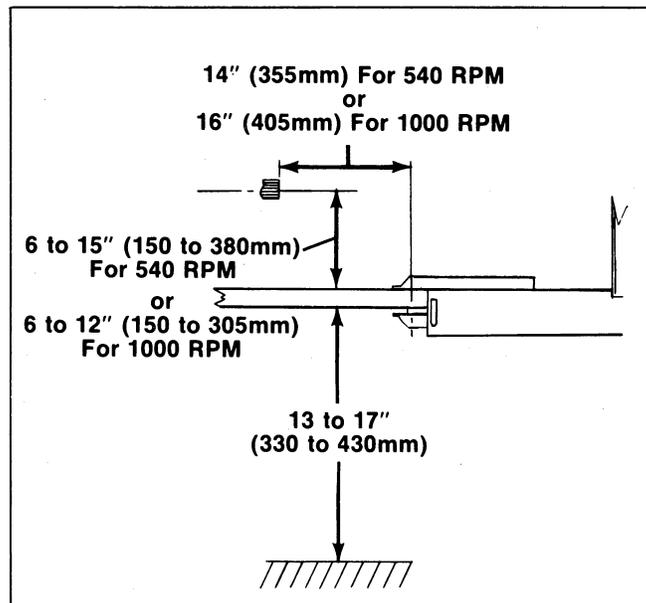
Tractor Drawbar - PTO Dimensions
